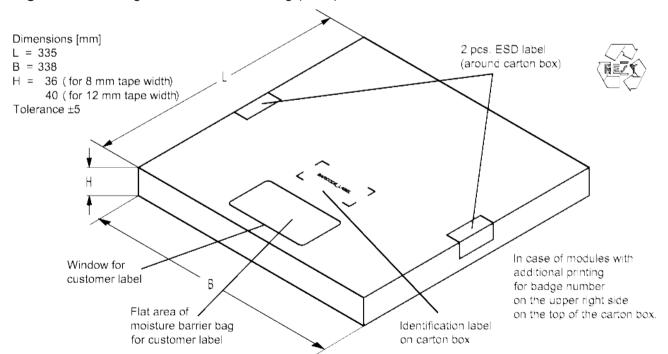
Drawing of folding box for reel with diameter of 330 mm.
